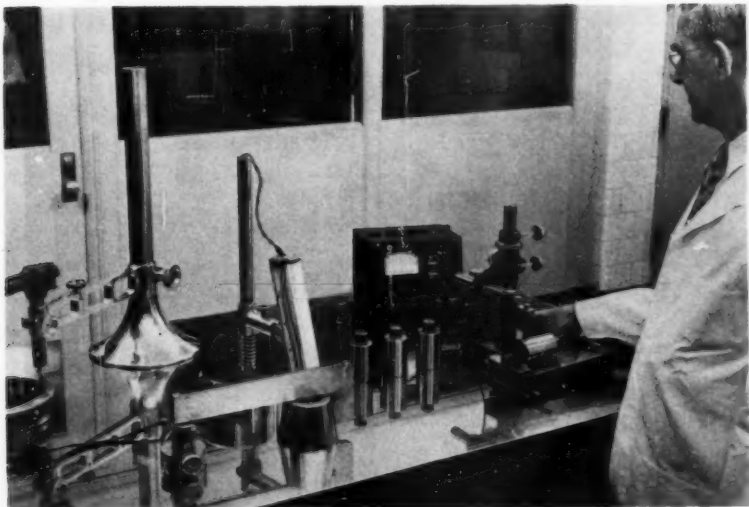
On this Graph-Mo surface plate, the operator is checking a roller master for size and taper. At left (rear), Graph-Mo ring gage is checked for length. Cone taper gage is checked for taper in center foreground. It is one of the flattest plates of its size in the world -- within 50 millionths.
